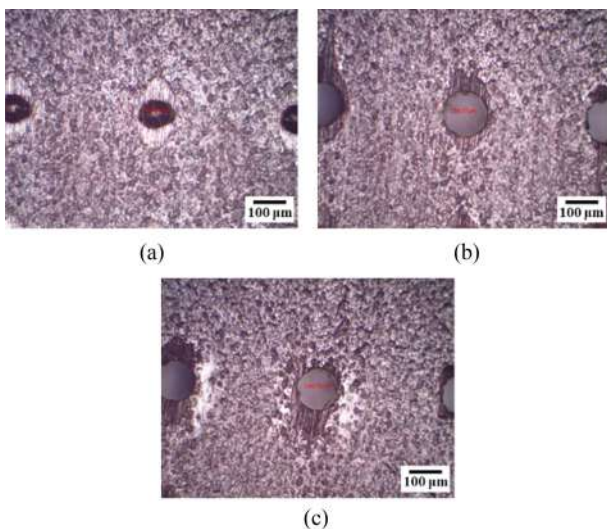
Micro holes with a diameter of 150 μm by using hybrid machining: (a) After laser pre-processing (30% power, 5 repetitions); after EDM post-processing (100 V, 5 nF, tool size 125 μm) (b) Front view, (c) Backside view
